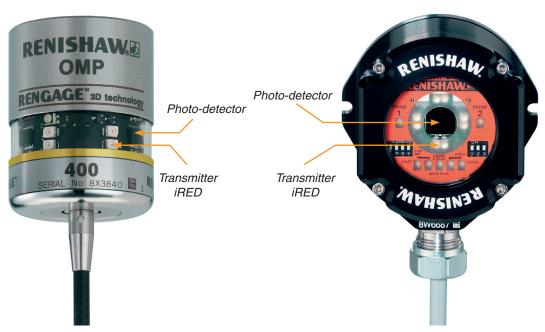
OMP400 workpiece inspection probe with optical transmission
